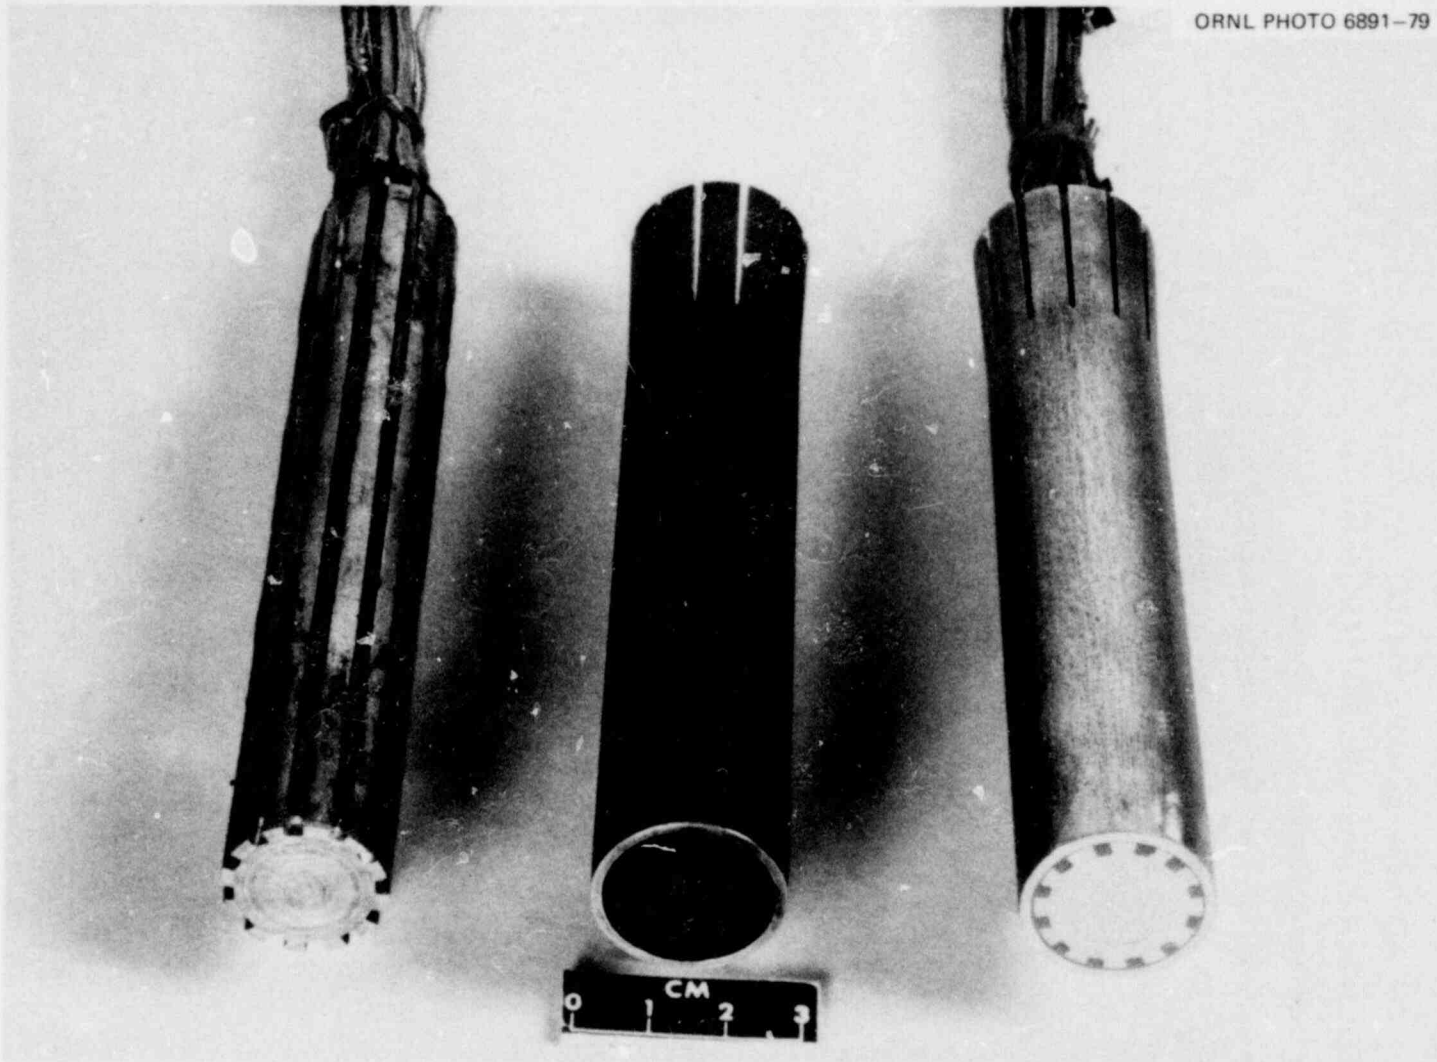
TSE-5 thermocouple thimble components and assembly.
